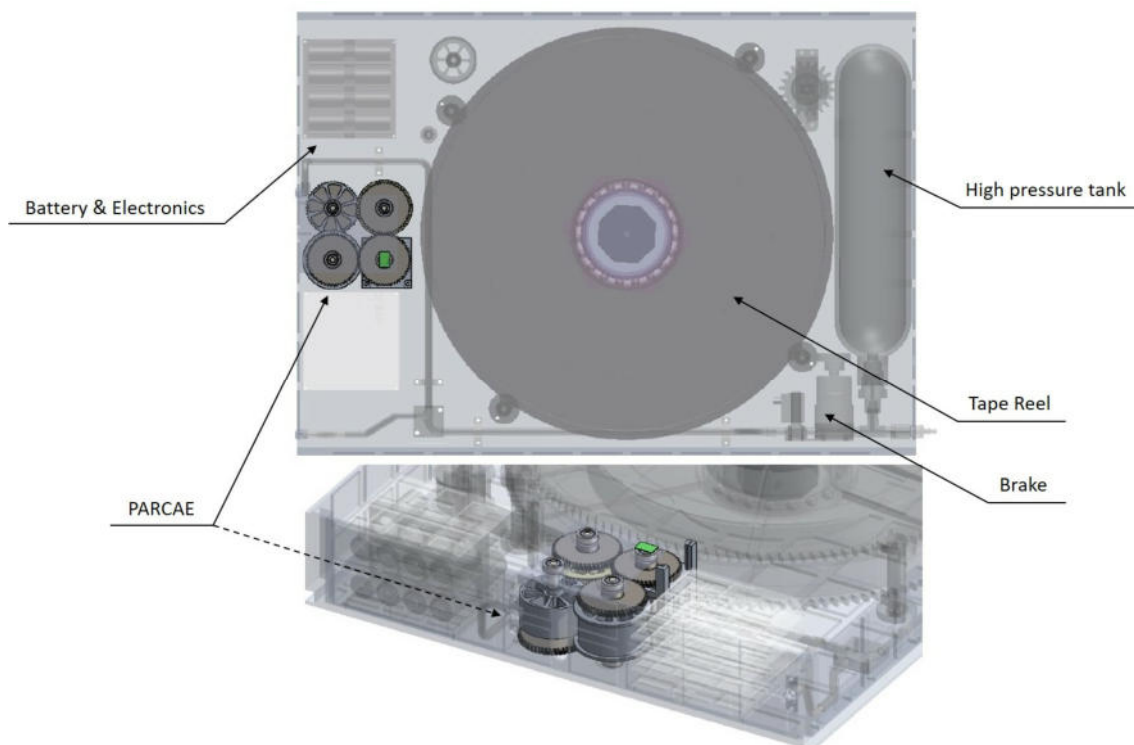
E.T.Pack global layout; Pulleys, Actuator, and Roll Compression Assembly for E.T.Pack (PARCAE) subsystem is visible and highlighted.
